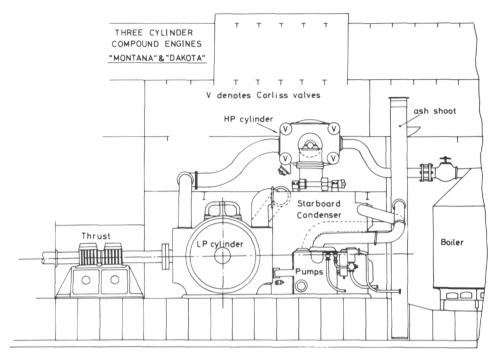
Section through engine room of "Montana" and "Dakota".
